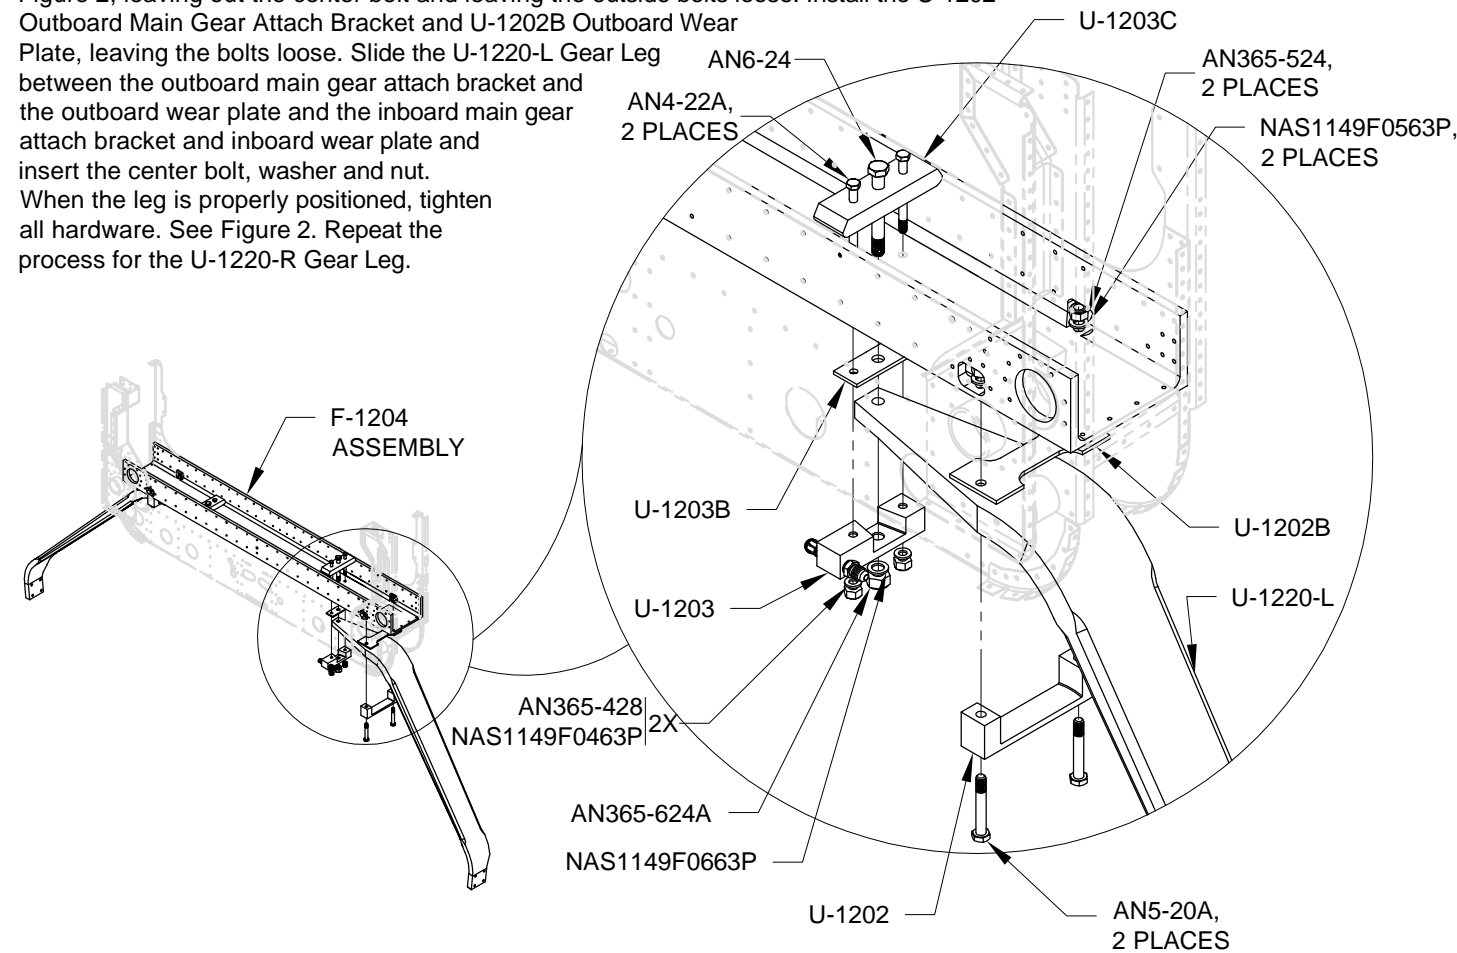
ADDING FITTINGS TO THE INBOARD MAIN GEAR ATTACH BRACKETS
